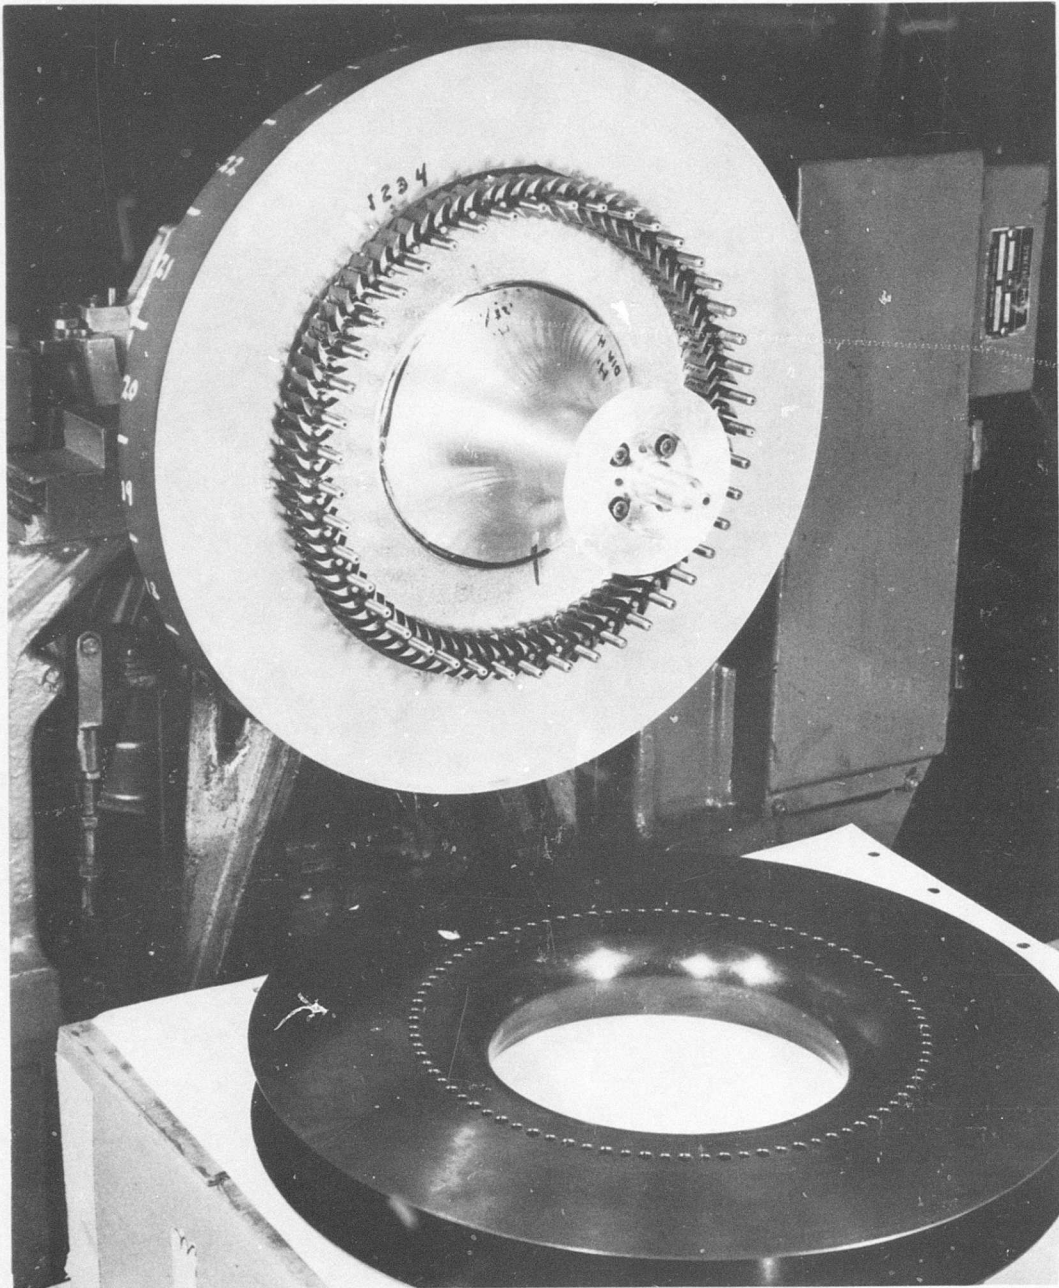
High-Speed ROC Rotor Prior to Assembly of Rotating Shroud.
